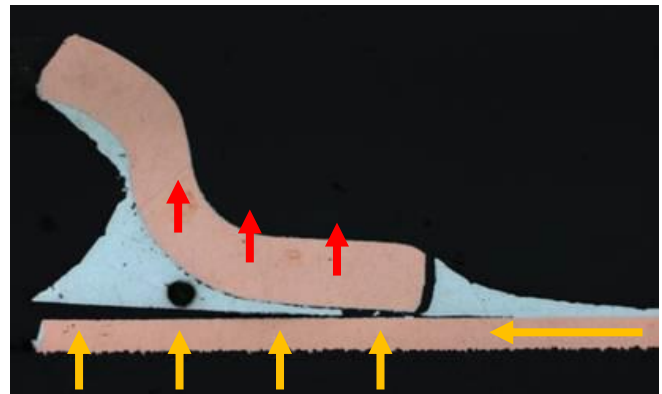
Directional melting of a SMT solder joint due to heat from the THT soldering (represented by yellow arrows). Tensile stress due to component warpage (represented by red arrows).
